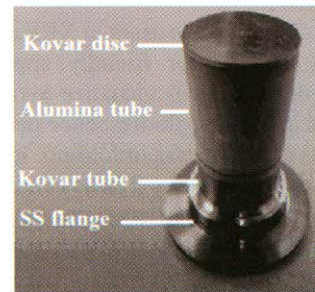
Al₂O₃/Kovar component brazed in partial pressure induction furnace.
